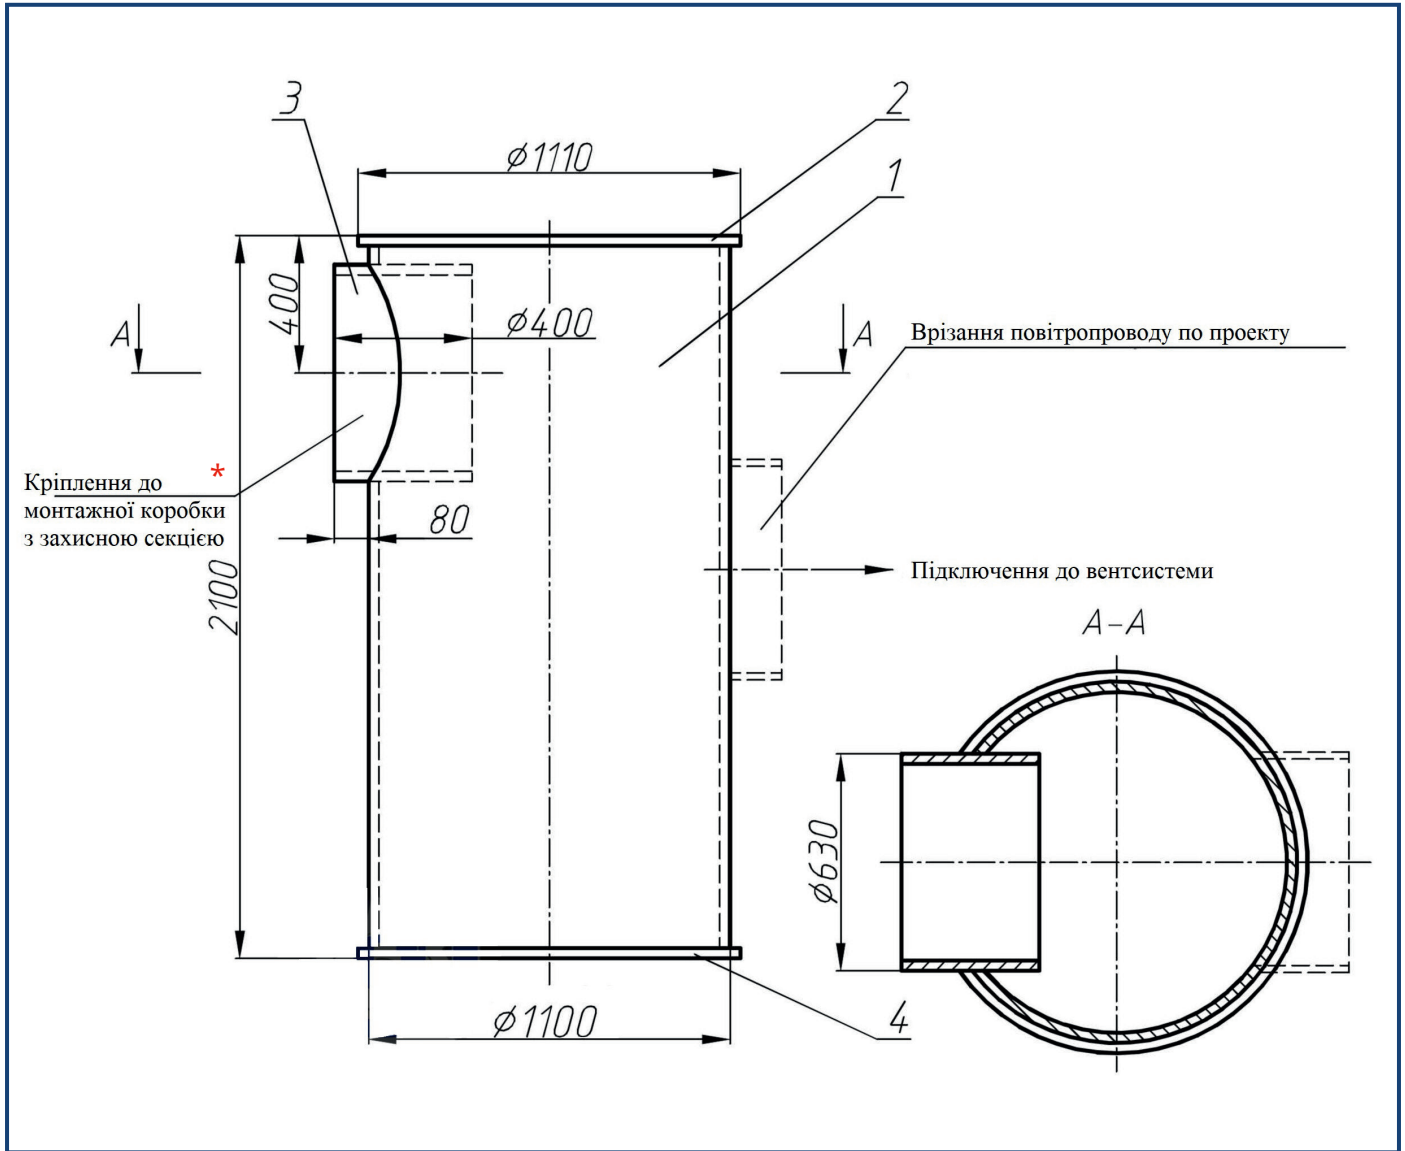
Overall and connecting dimensions of the expansion BRK-1A
